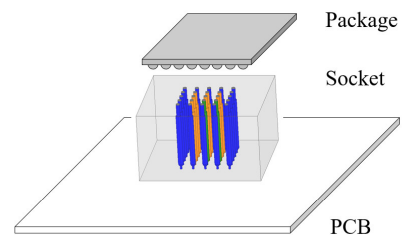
Diagram of a pogo pin socket with PKG and PCB.
